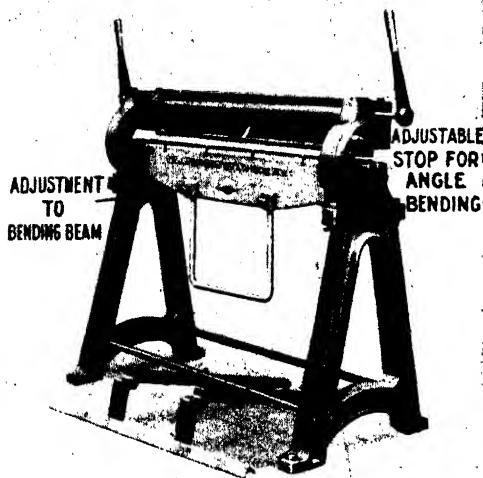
ANGLE BENDER OR CRAMP FOLDER
